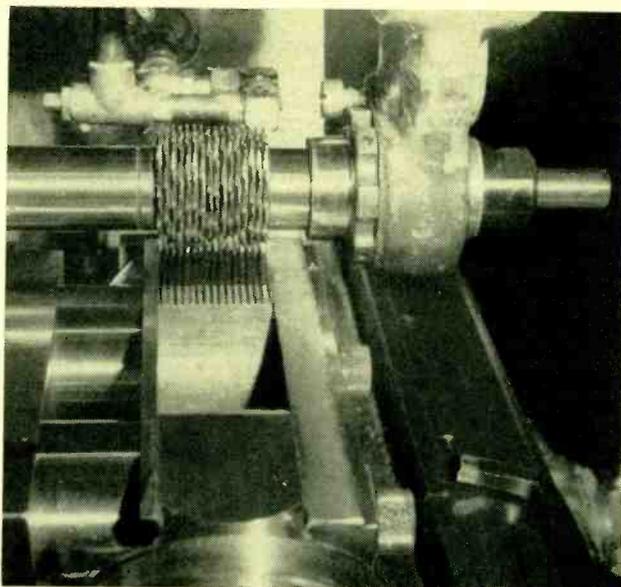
Ganged carbide-tipped cutters mill 32 cooling-fin slots in magnetron shell. Sixteen slots are cut at a time. Tolerance is on width $+0.002$, -0.002 and ± 0.005 for depth and location
